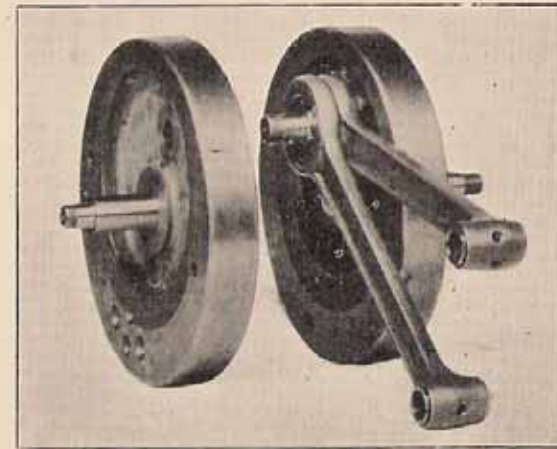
THE TWIN BEARING CONNECTING-ROD MOUNTING OF TWIN CYLINDER 7-99 H.P. MODELS
